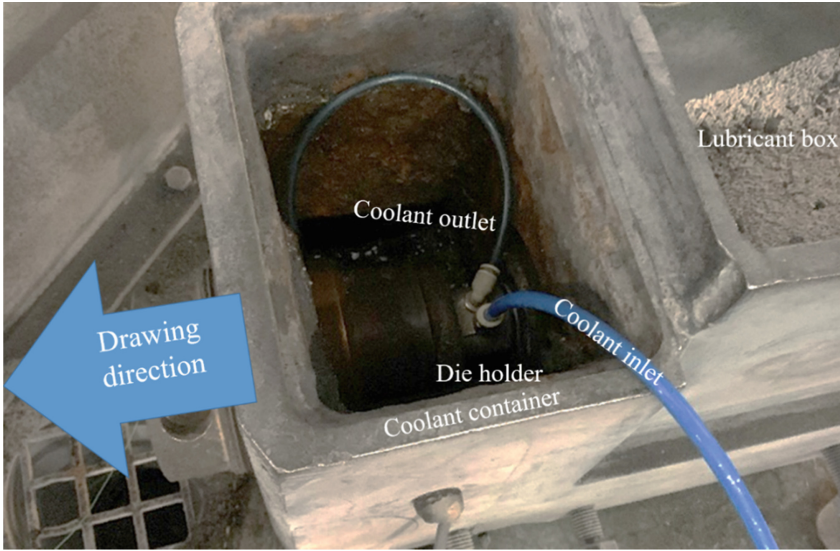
Additively manufactured die holder mounted in a conventional wire drawing machine.
